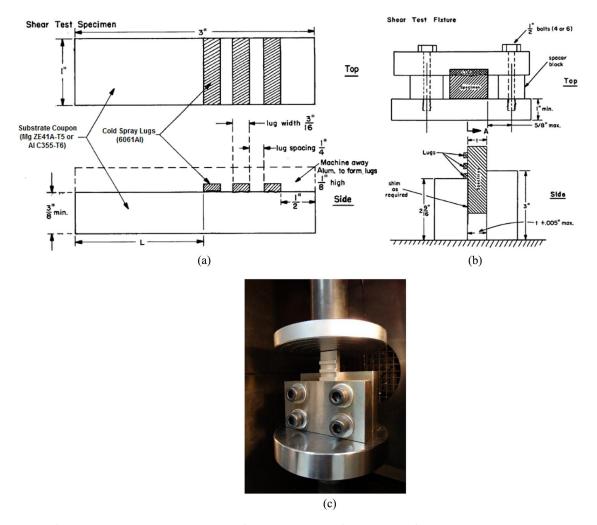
Schematic of the triple lug shear test specimen (a), test fixture (b) and photo of the actual load frame and testing set-up (c).
